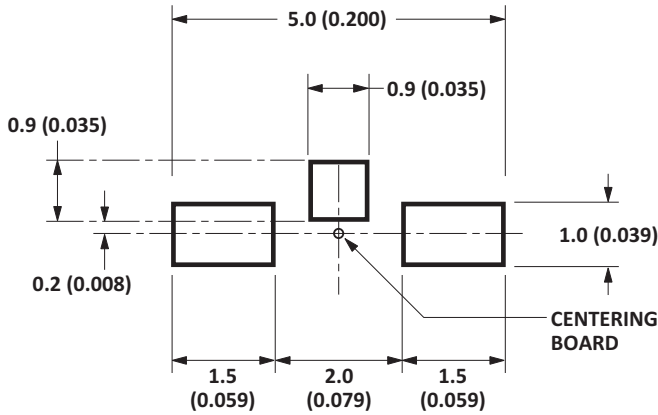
Recommended Soldering Pattern for HSMx-C170/177
